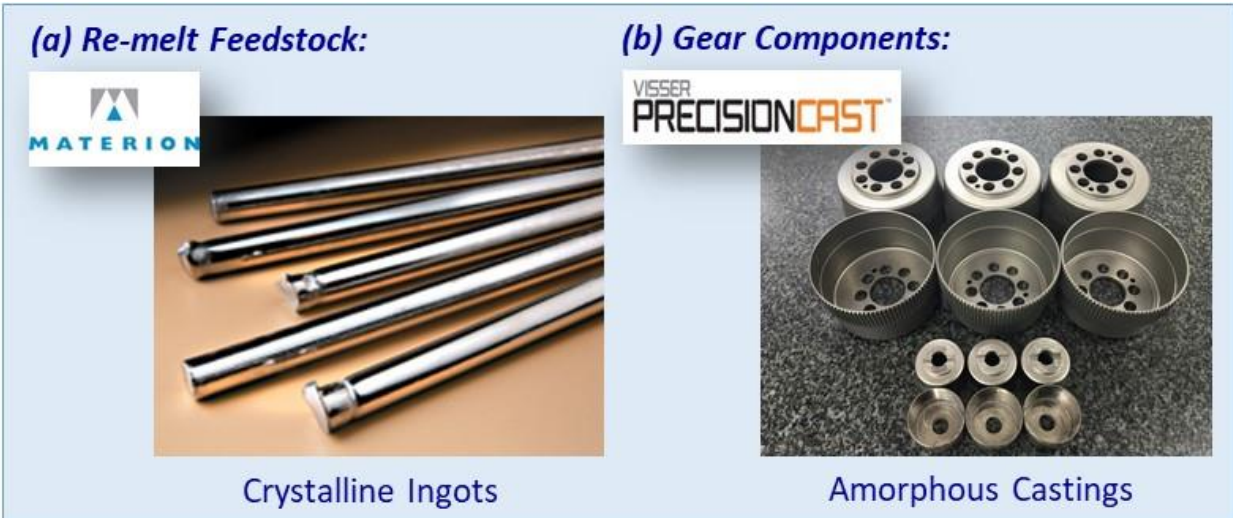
BMG gear manufacture involves two materials suppliers: (a), re-melt feedstock, in the form of crystalline ingots; (b), gear components, in the form of amorphous castings.
